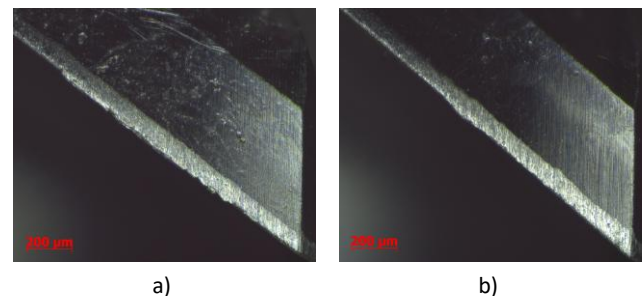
Tool wear of a) untreated and b) treated tools under 25 m/min cutting speed
